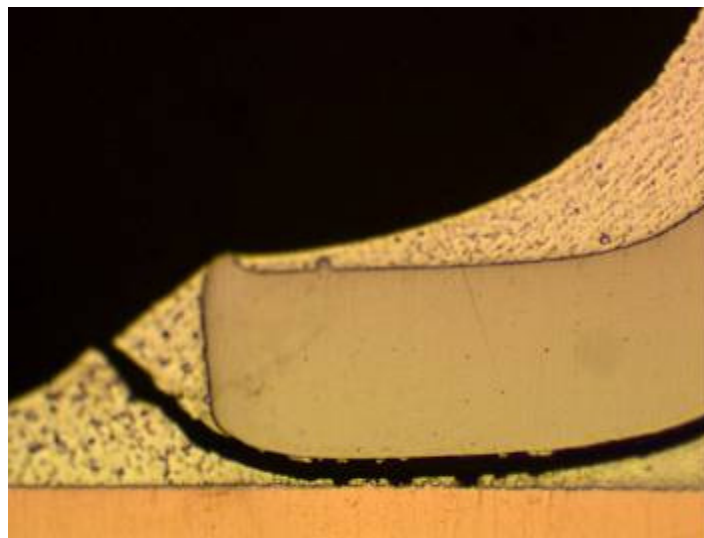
cross section, SN63, U16, left lead solder crack, 200xa
